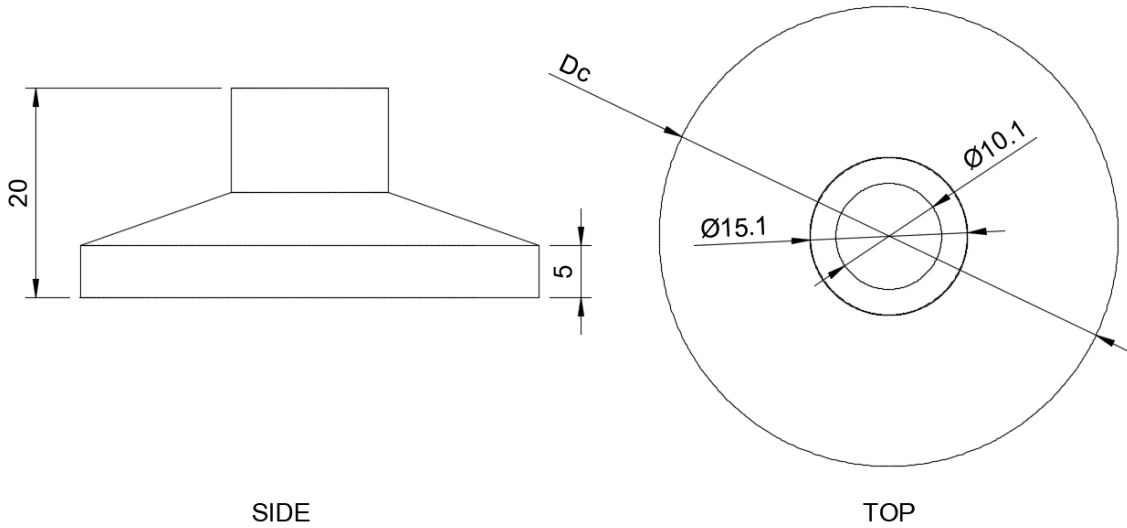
Drawing of the centering tool used for centering the test pieces in the 3D-printed jig. All measurements are in *mm*.
